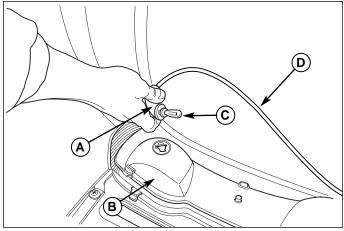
Headlight Lamp Removal and ReplacementA. SocketC. Halogen Bulb
